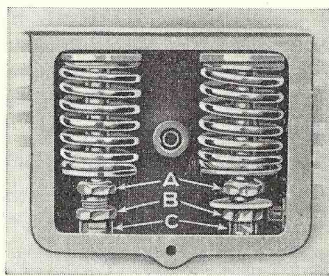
METHOD OF ADJUSTING VALVE-STEM CLEARANCE — ALL 1937-59 600-C.C. SIDE-VALVE MODELS.
